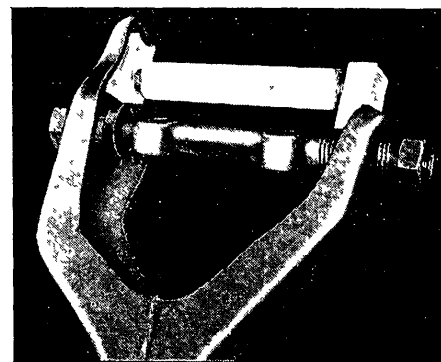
1950-52. Using calipers and spreader tool to establish proper spread of outer ends of upper control arm
